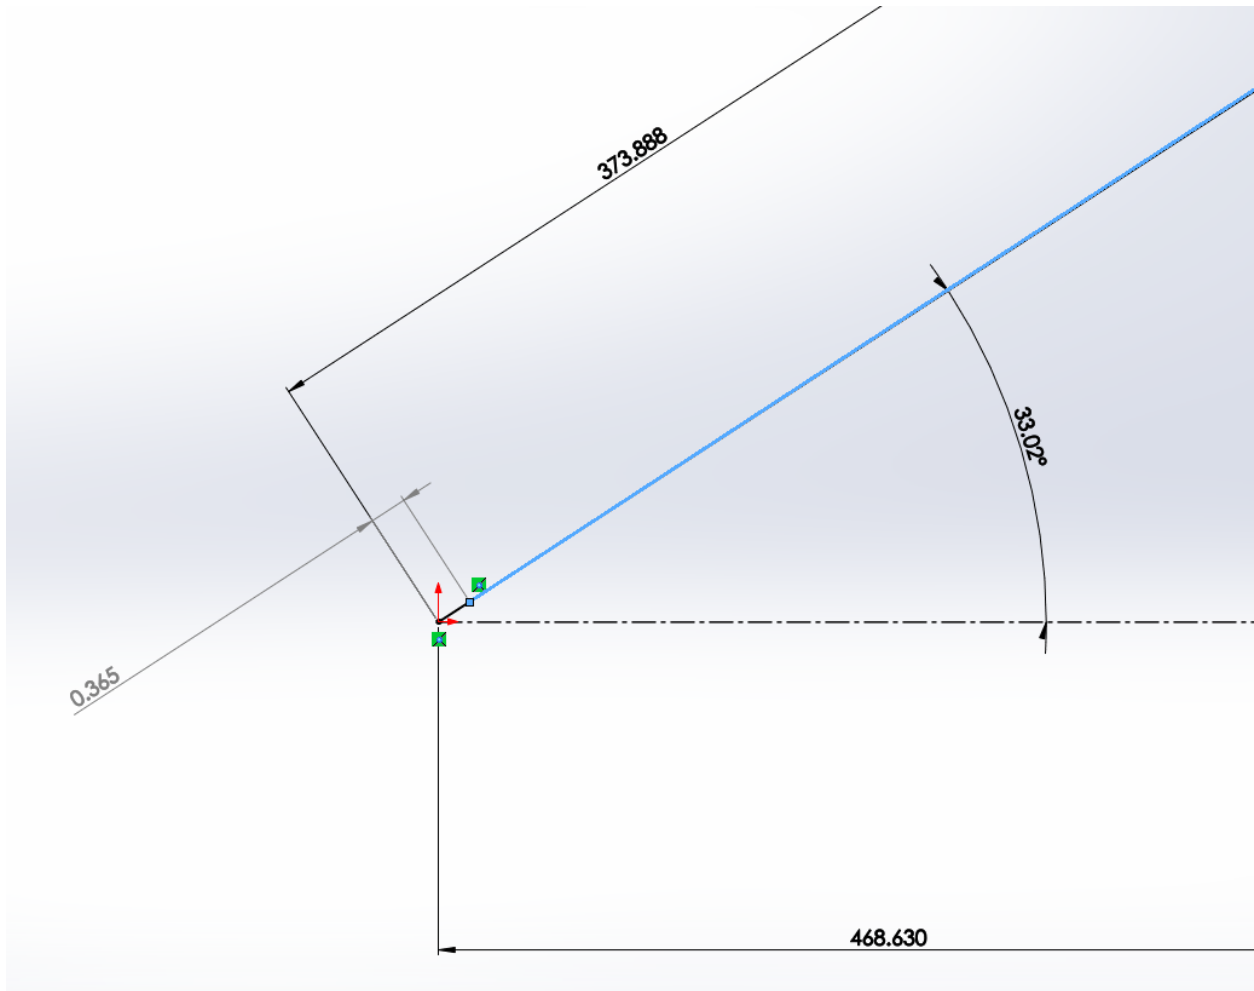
Close Up of Front Rocker-Pull Rod Pickup Location in the Front Plane (Full Bump)
